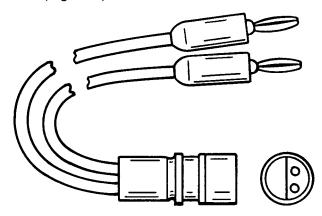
P/N 91-814746 T.P.I. Test Lead Assembly
